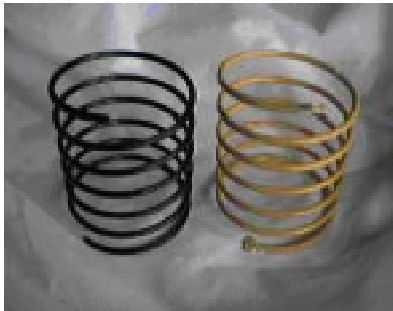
Fabricated Composite Coil Springs(unit:mm)
